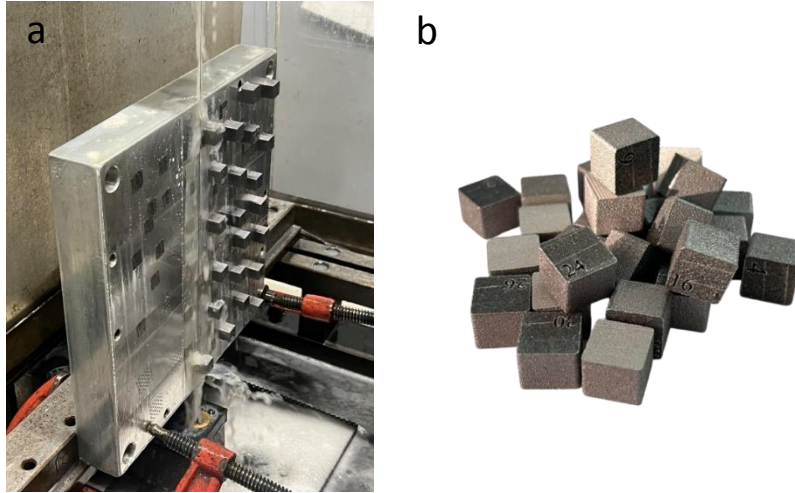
(a) Build platform clamped to Wire-EDM machine, (b) Samples after cutting
